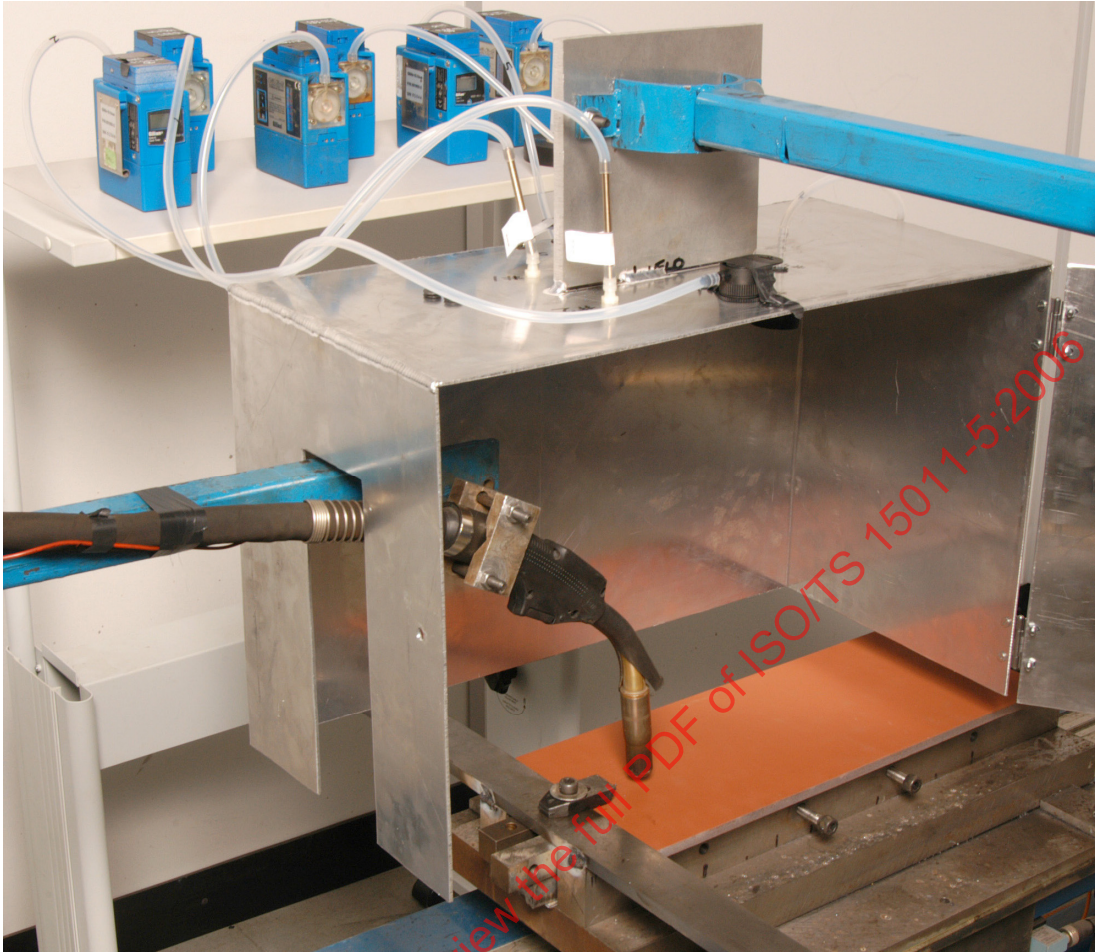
Example of a sampling chamber for arc and plasma welding and cutting processes, with the access door open
